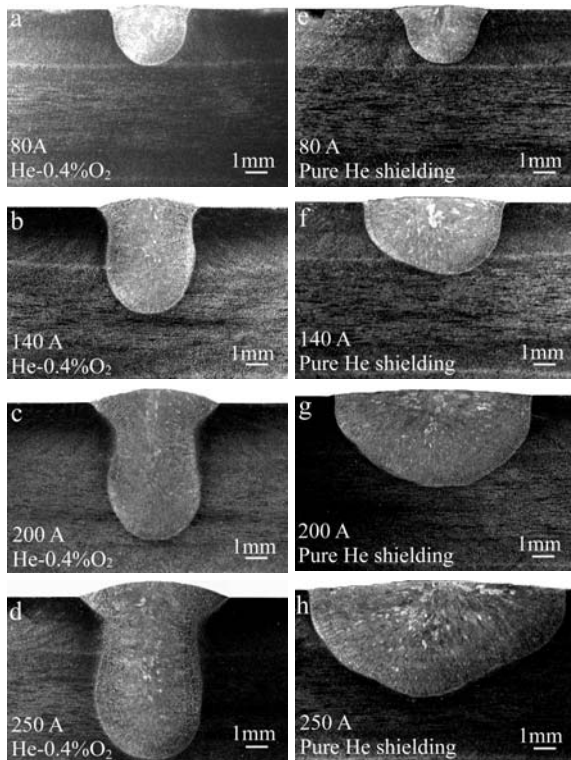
Weld shapes at different welding current for pure He and He-0.4%O₂ shielding gases.
